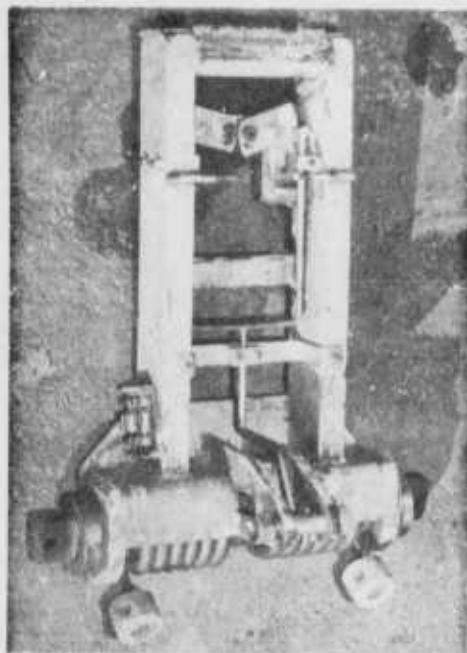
SUPPORT ARM WITH FINAL LATCH MECHANISM INSTALLED
